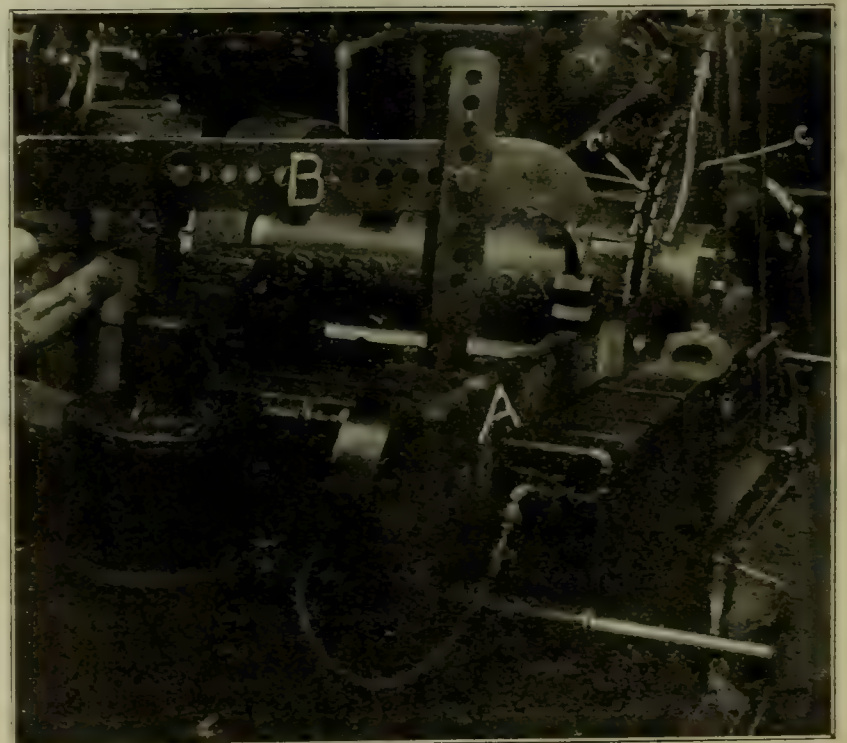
Milling Cutter for Driving Tire Forming Tools.
